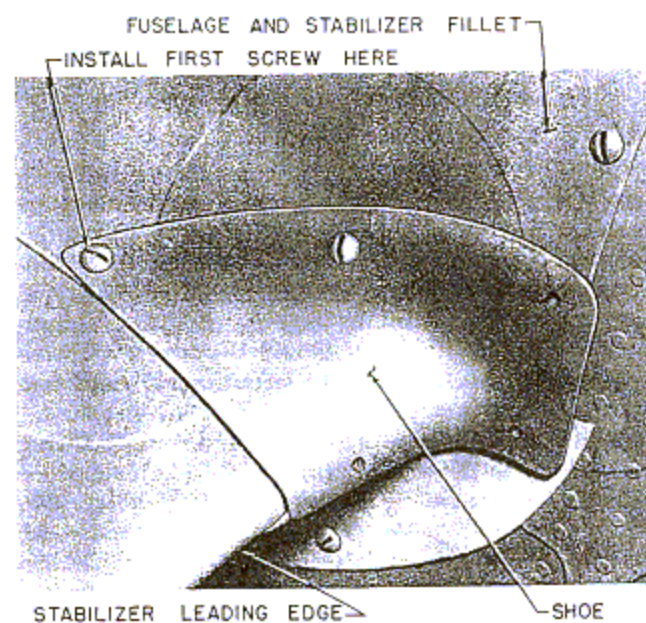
Installing Fuselage and Stabilizer Fillet—Step 4
